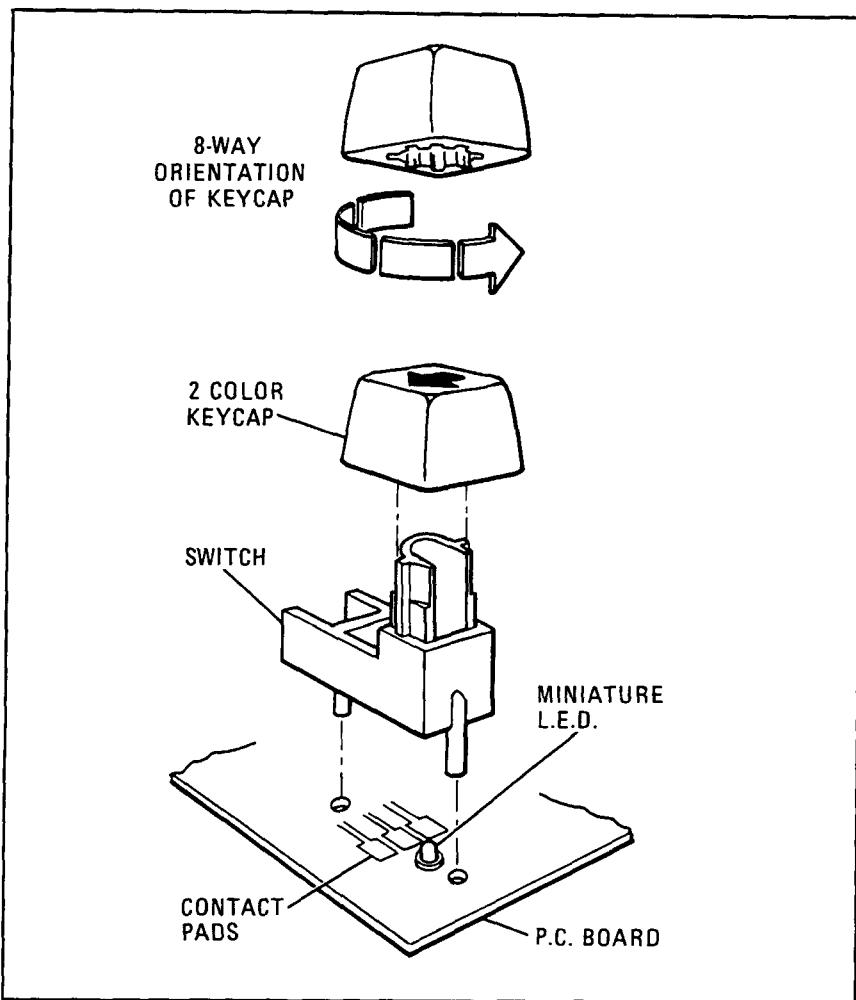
C-1. Front-Panel Pushbutton Switch Assembly
